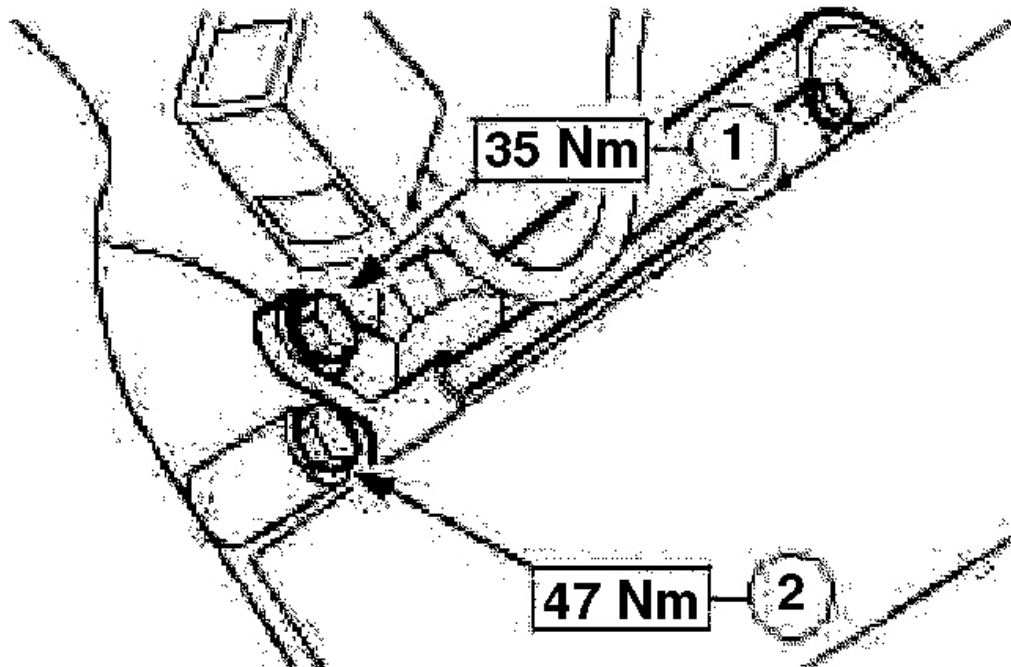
Tightening Transaxle Flange Left-Hand Bolts
